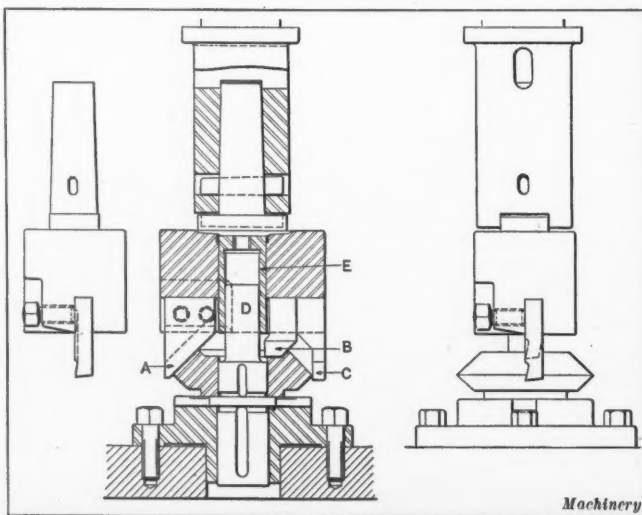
Sectional View of Tool and Work-holding Fixture shown in Fig. 2
